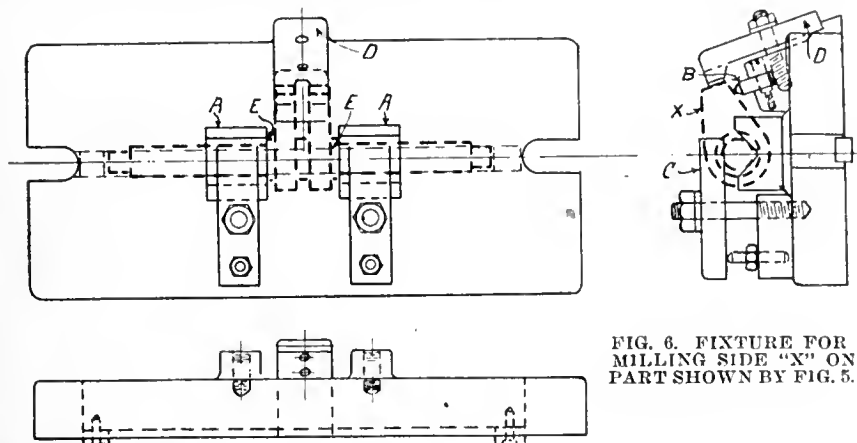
FIXTURE FOR MILLING SIDE "X" ON PART SHOWN BY FIG. 5.
